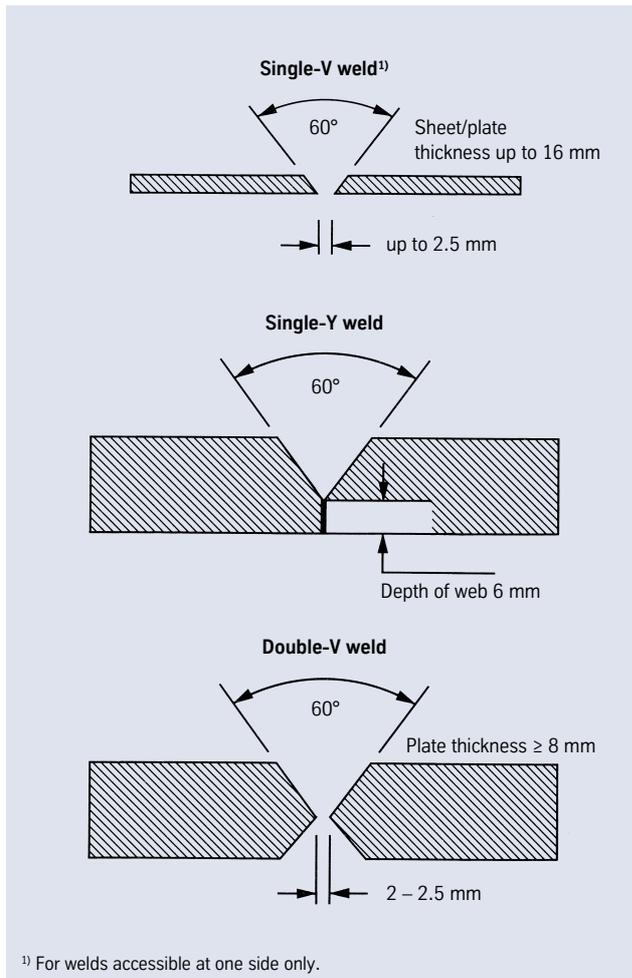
Edge preparation for welding of Nicrofer 3718/3718 So* (exemplary).
